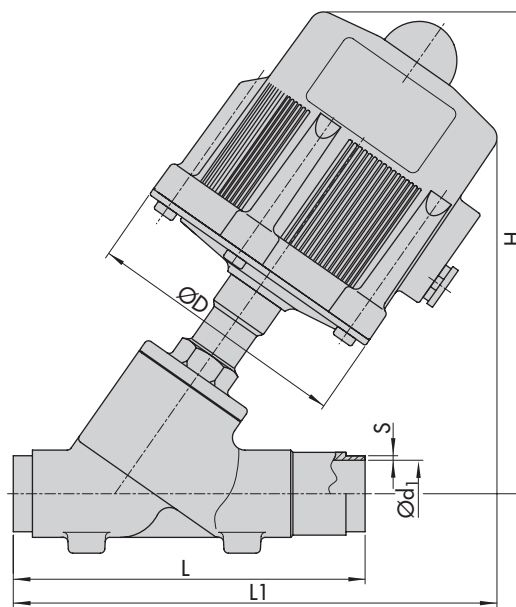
Type 3353 Angle Seat Valve with welding ends
